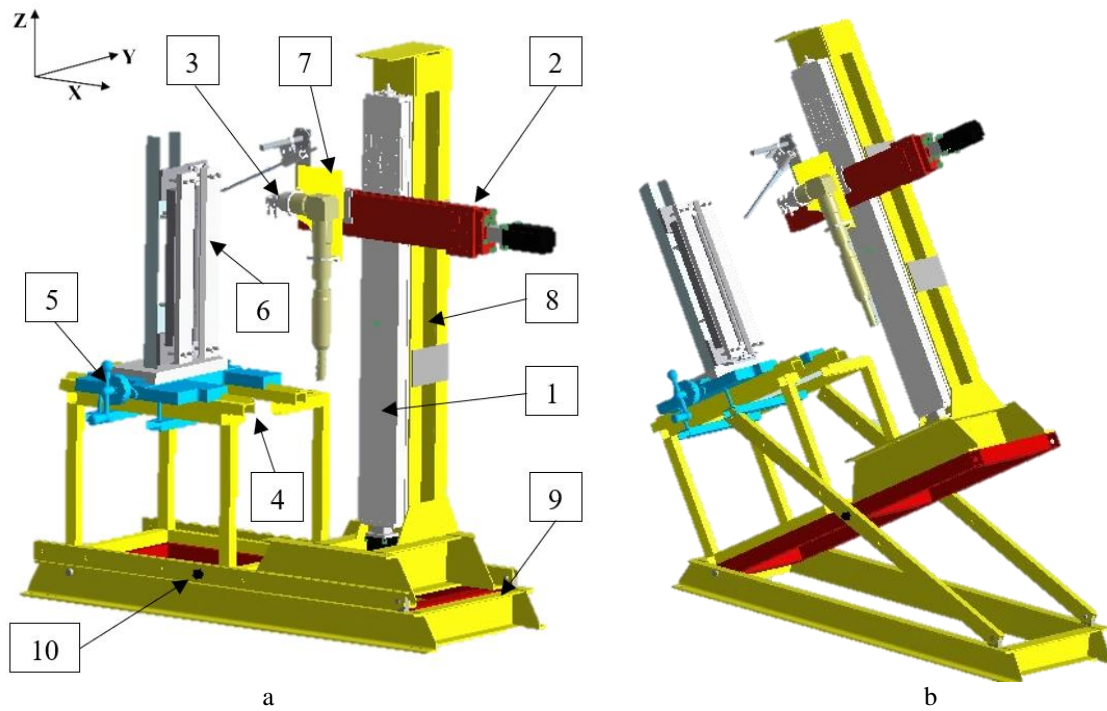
Model of the laboratory test bench (a): 1 – linear motion module along the Z-axis, 2 – linear motion module along the X-axis, 3 – welding head, 4 – clamp for fixing welding specimens, 5 – platform for moving the clamp in the XY plane, 6 – clamp with a specimen, 7 – bracket for mounting the welding head, 8 – column, 9 – fixed frame, 10 – rotary hinge mechanism; (b) Model of the laboratory stand in an inclined position
